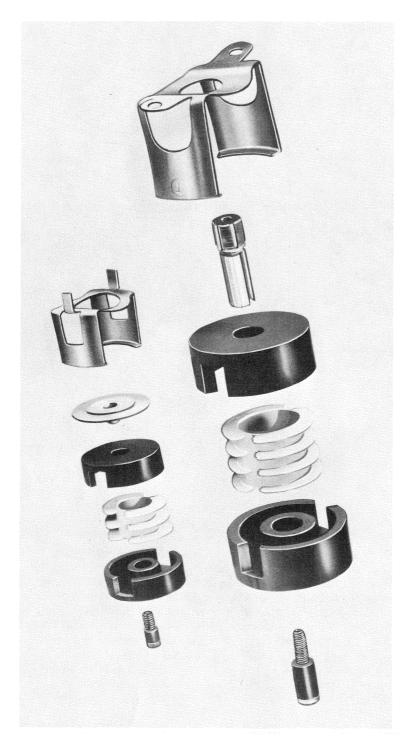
A typical pot core assembly. (Photo courtesy of Magnetics, Division of Spang & Co., Butler, PA.)
